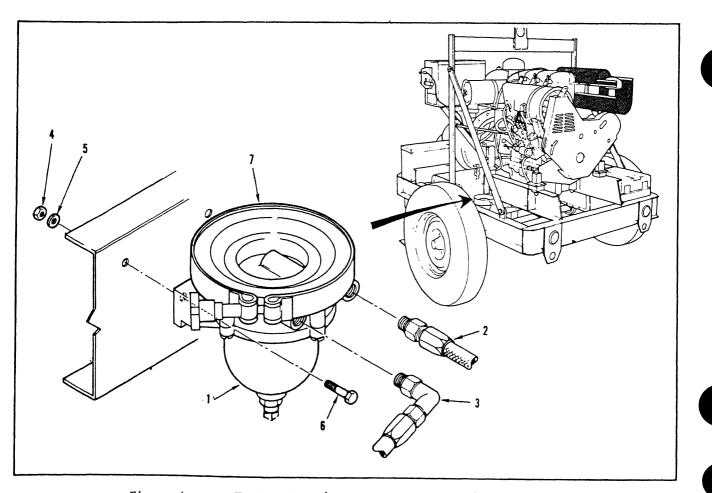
Fuel Filter/Separator, Removal/Installation
